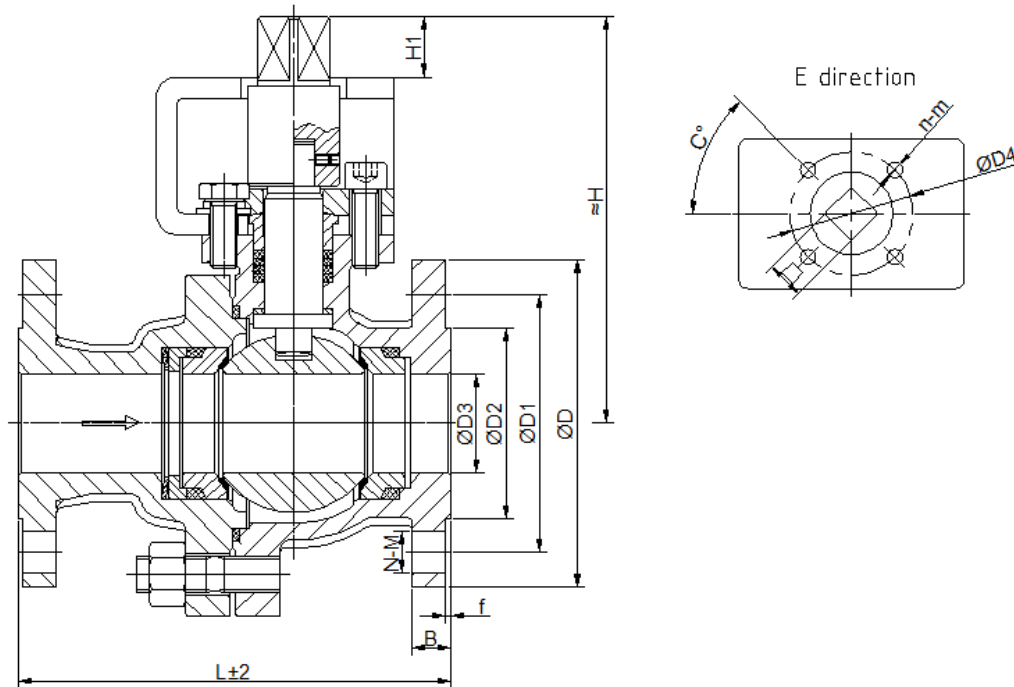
Dimensions of Linor floating ball valve with high temperature seat bare shaft, PN16, flanged, sizes DN15-150
